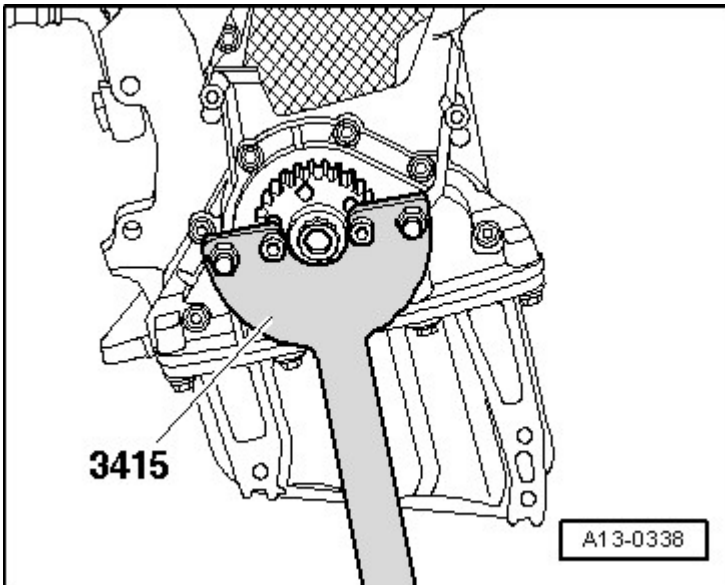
Crankshaft Toothed Belt Sprocket, Removing And Installing
